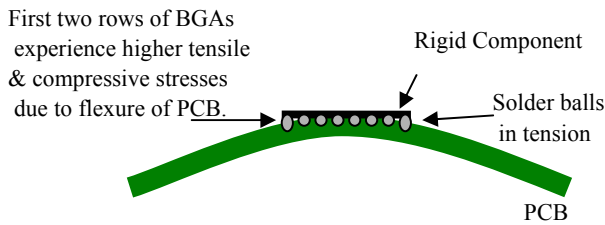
Exaggerated flexure of PCB and its effect on a BGA component at first mode of vibration.
